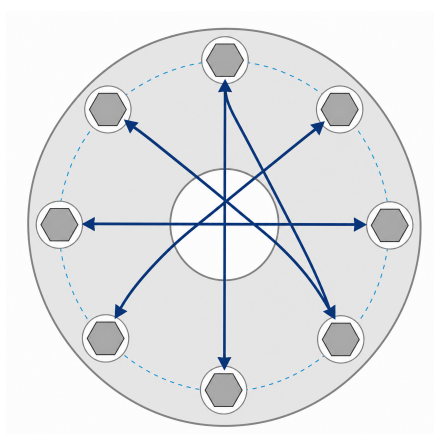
Criss-cross (star) bolt tightening sequence for flanged joints and strainer covers.
